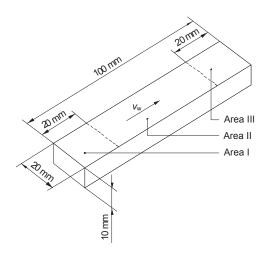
Workpiece dimensions with marked conventional areas (Areas I–III) on the machined surface v_w is the workpiece speed
